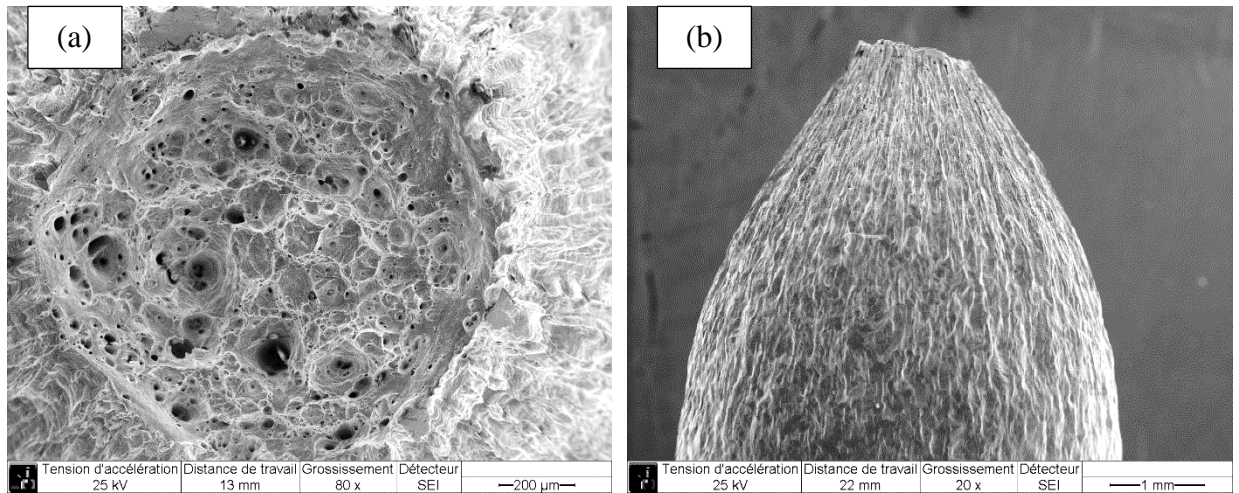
25 SEM images of the fracture surface (a) and the side view of fracture part (b) of the specimen tested under nitrogen at $d\varepsilon/dt = 5 \times 10^{-6} s^{-1}$ (FCS7).
